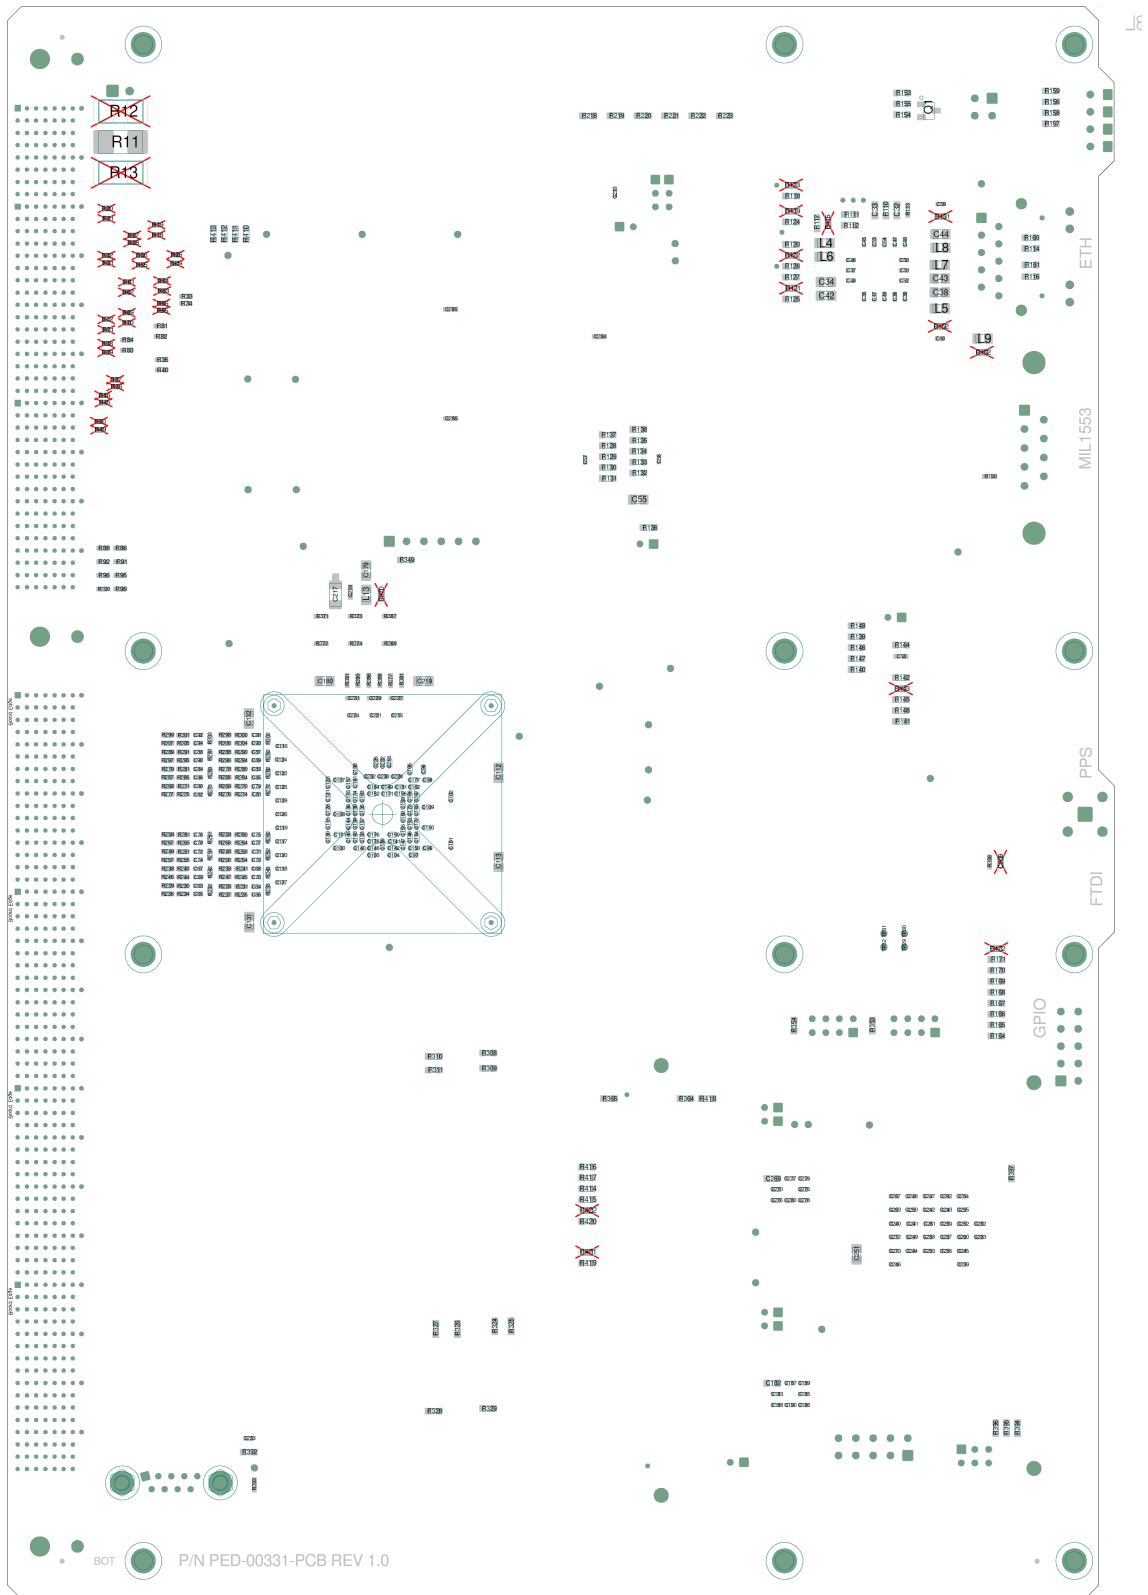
GR-VPX-GR740 PCB Bottom View
